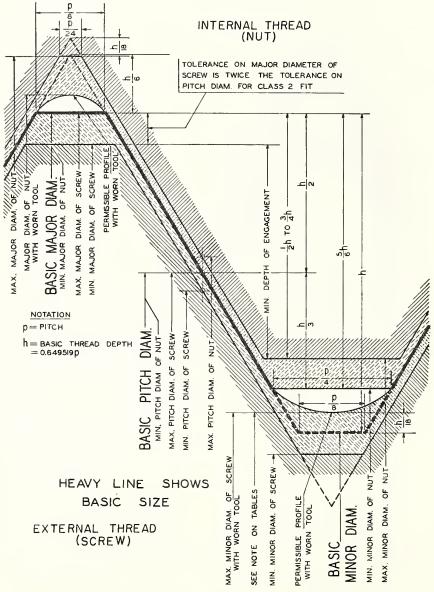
Disposition of tolerances and crest clearances for class 3.
